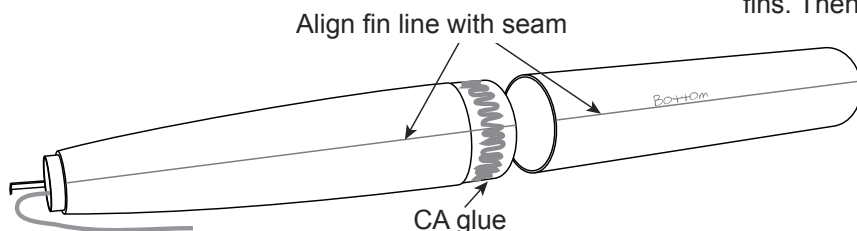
Use thick CA glue to attach the boattail to the tube. Thread the shock cord out the back temporarily so it doesn't get glue on it.
